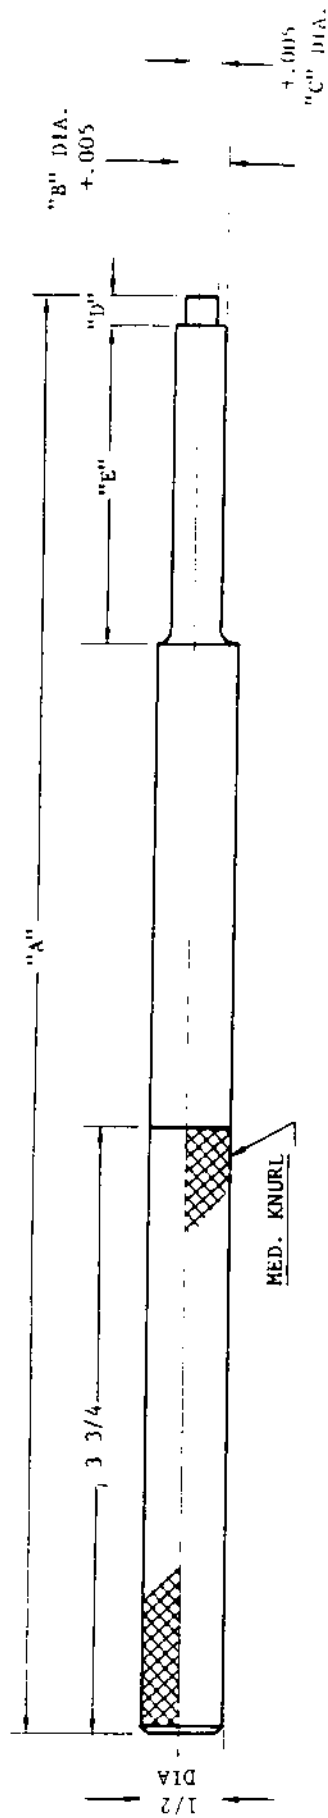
Tool No. 2,3,4,5,6,20,21,22
